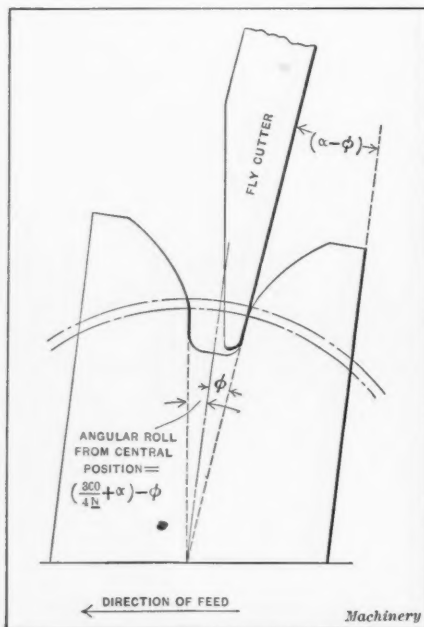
Diagram showing Angular Relation between Fly Cutter and Forming Tool at Conclusion of Roll to give the Proper Radial Flank
